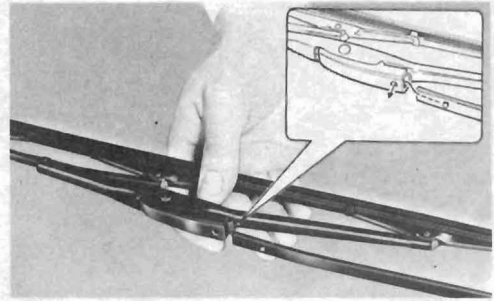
Alternative type of blade fixing to windscreen wiper arm (Sec 25)
